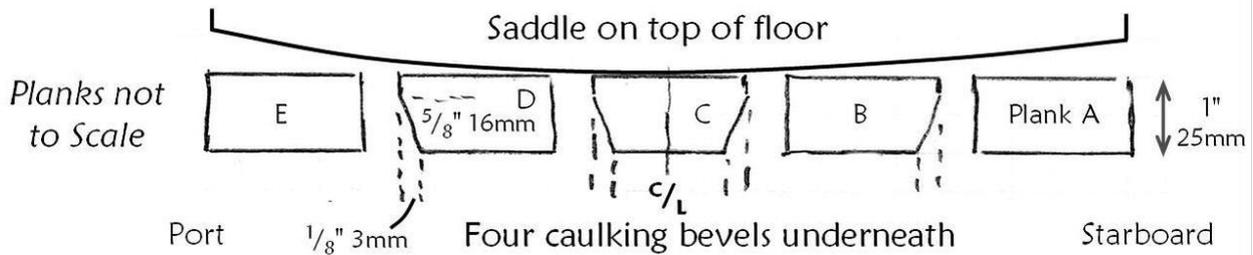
Dimensions of caulking bevels - section viewed from the stern.
